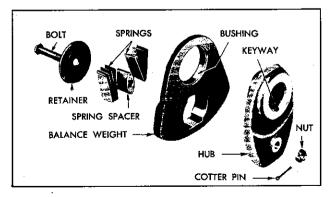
Details of Front Balance Weight Assemblies for Six Cylinder Engines.
